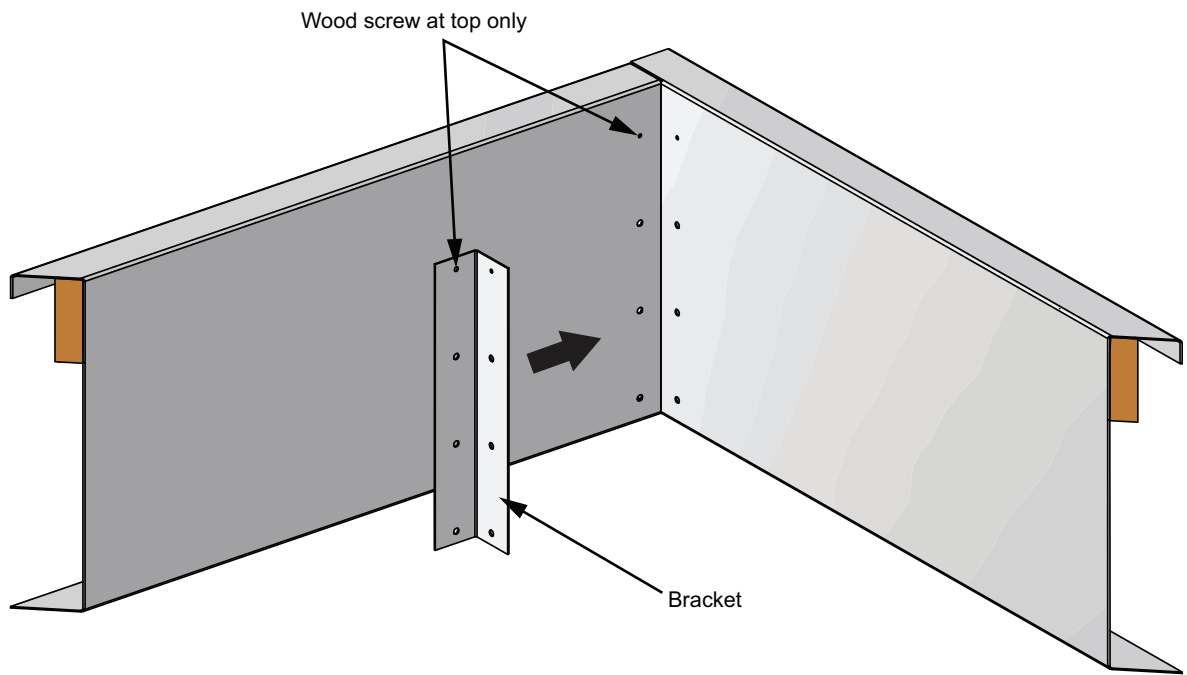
Corner Bracket Assembly (Sides and Ends Exploded)
